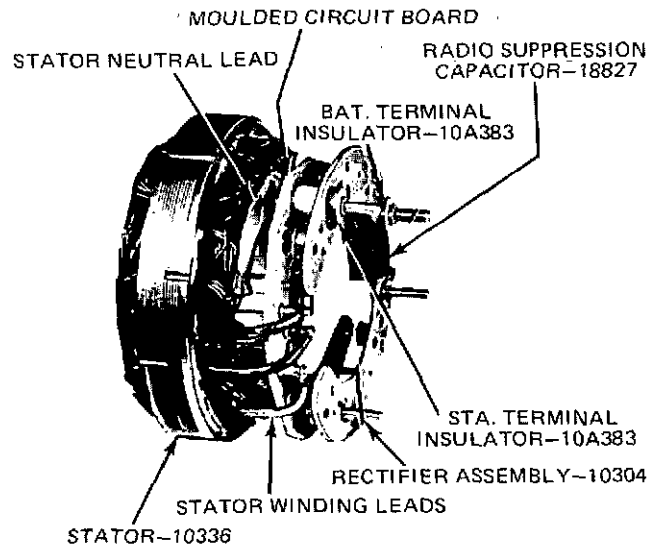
Stator Lead Connections – Except 61-Ampere Alternator
